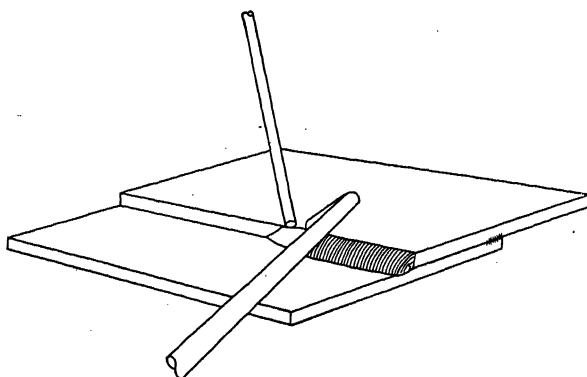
Flat lap weld. Note the two plates melting and flowing together ahead of the deposit.
